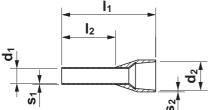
Dimensions (tolerances according to DIN 46228-4)
